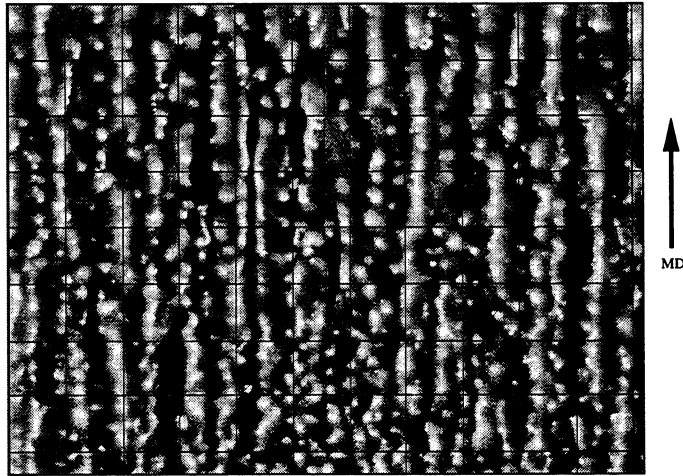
(d) Single frame image of the forming jet after impingement on the forming wire of machine D. The gridlines show a 1-inch length scale
